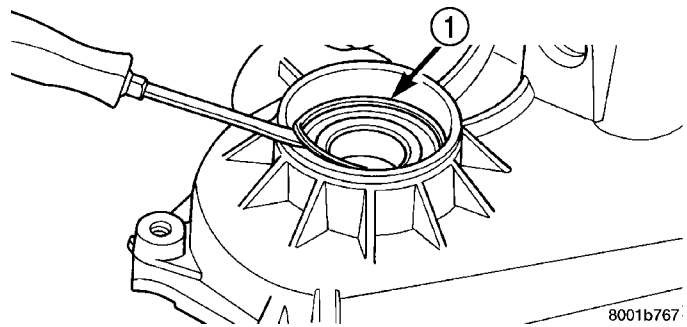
Installing Output Shaft Front Bearing Retaining Ring
